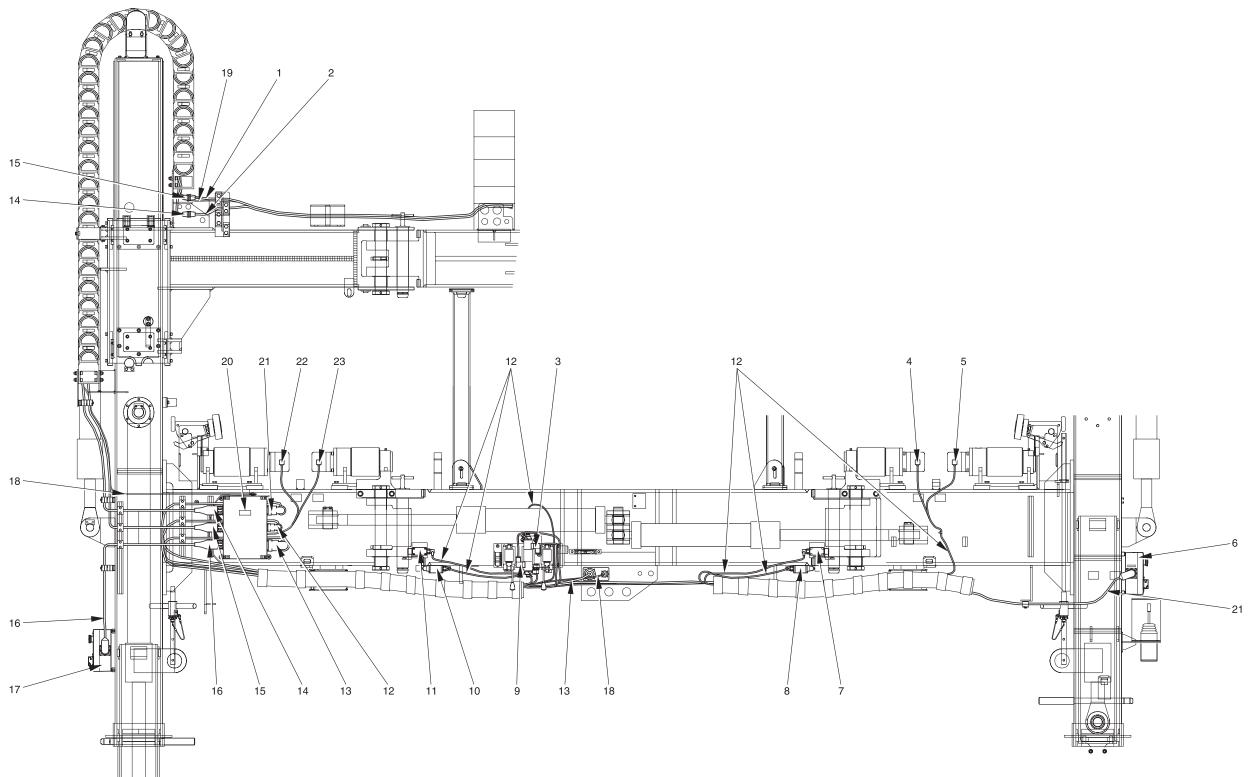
A-FRAME ELECTRICAL ASSEMBLY LOCATIONS
